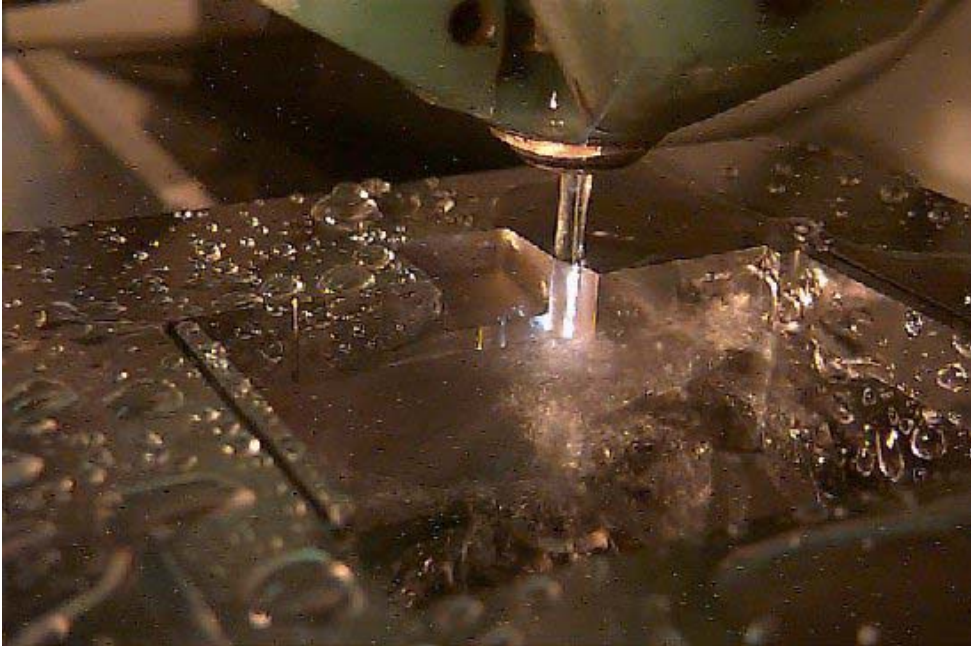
Wire EDM cutting the part (courtesy New Jersey Precision Inc.)
